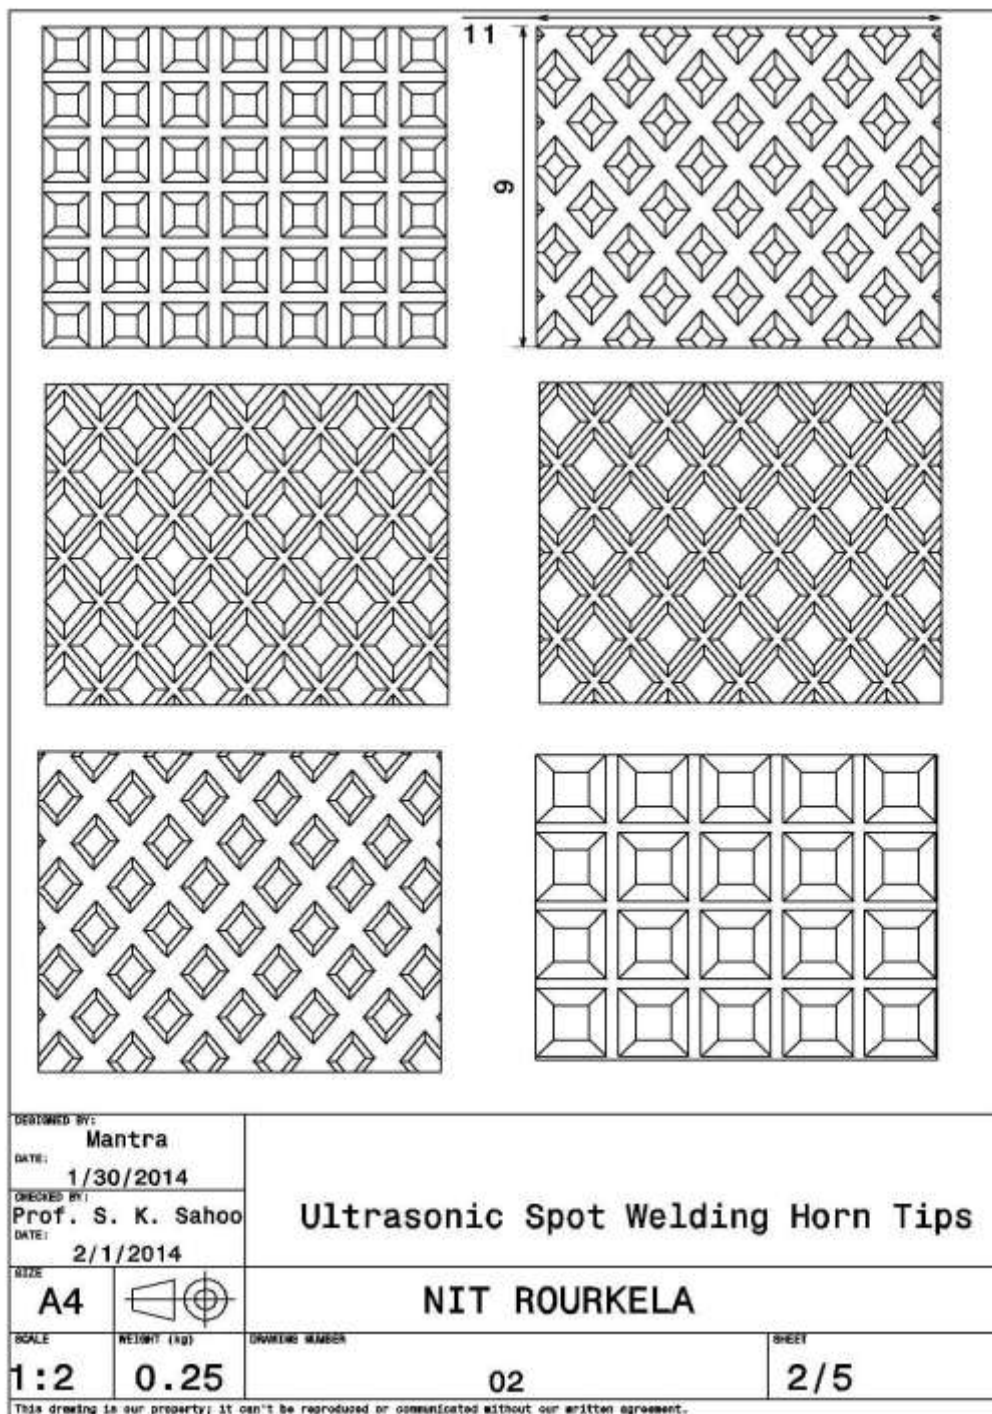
Ultrasonic spot welding horn tips
